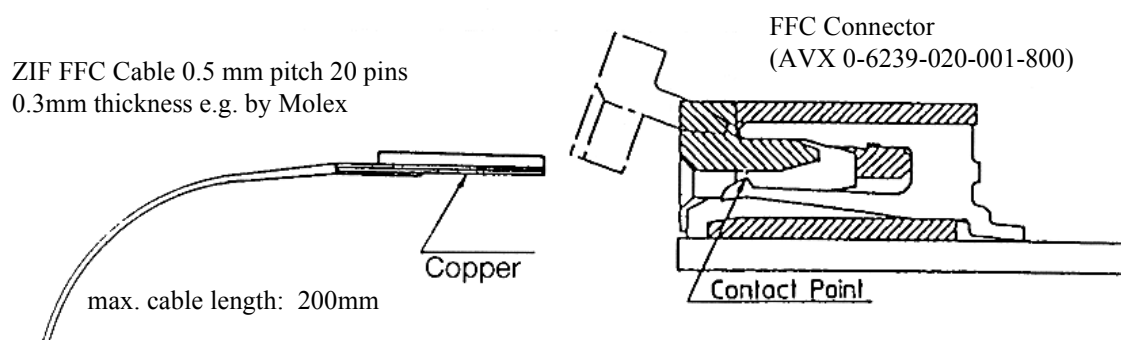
Detail Drawing of an FFC Cable Connection
